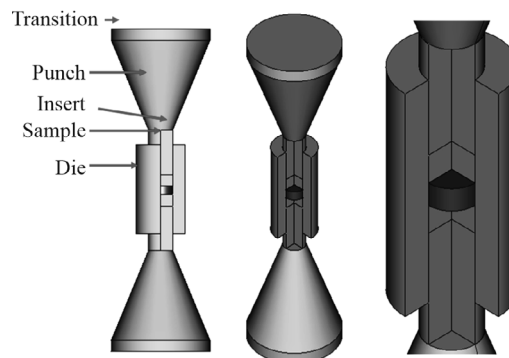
Schematic cutaway view of the setup of the SPS die assembly
